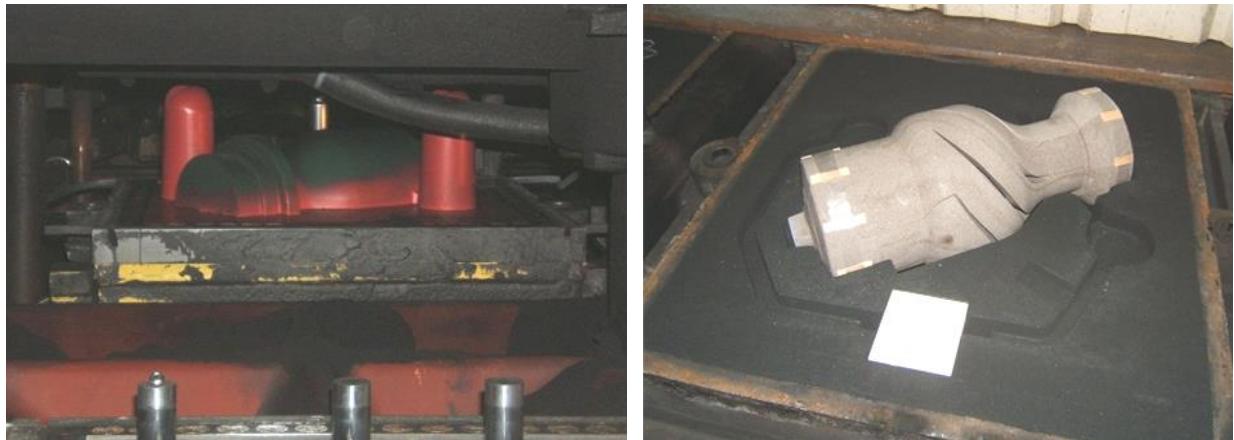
View of the outside resin-bonded form for the casting mould used for the stator bowl (left) and of the sand inner mould (right).
